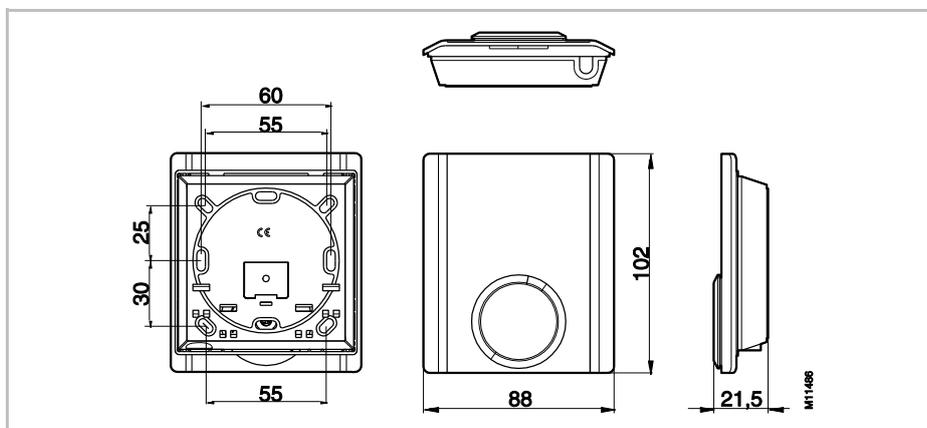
Dimensions wireless room thermostat without display (all dimensions in mm)
